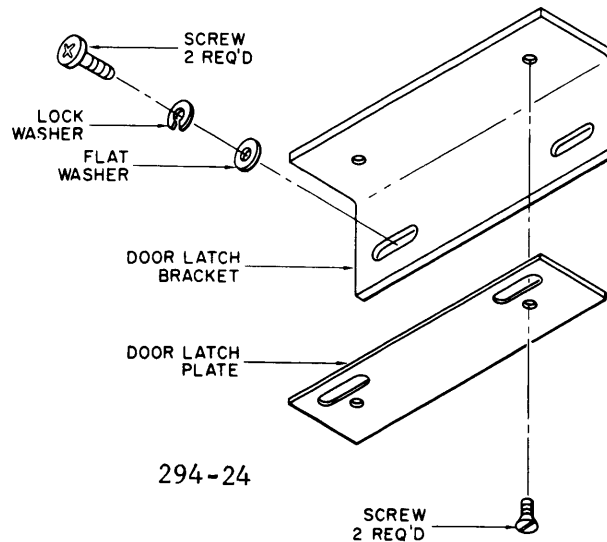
Door Latch Plates and Brackets, Installation Diagram.
